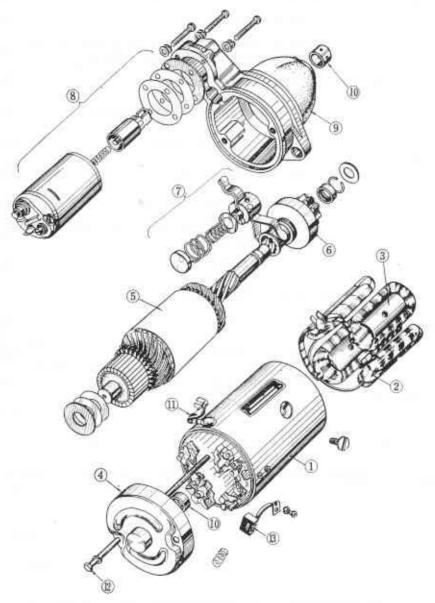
Component Parts of Starting Motor (MITSUBISHI ME-Y1R)
